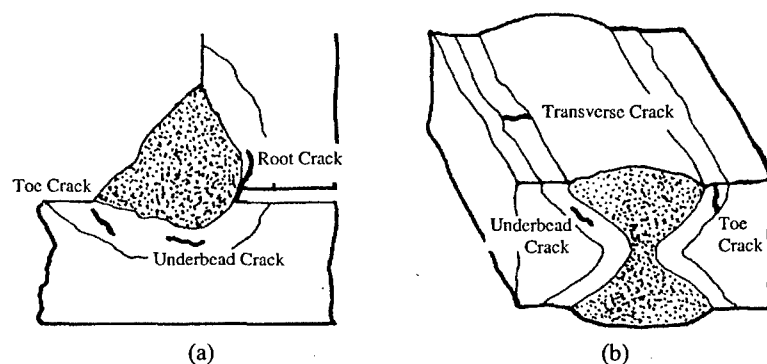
HAC in heat-affected zones of (a) fillet and (b) butt welds [126].
